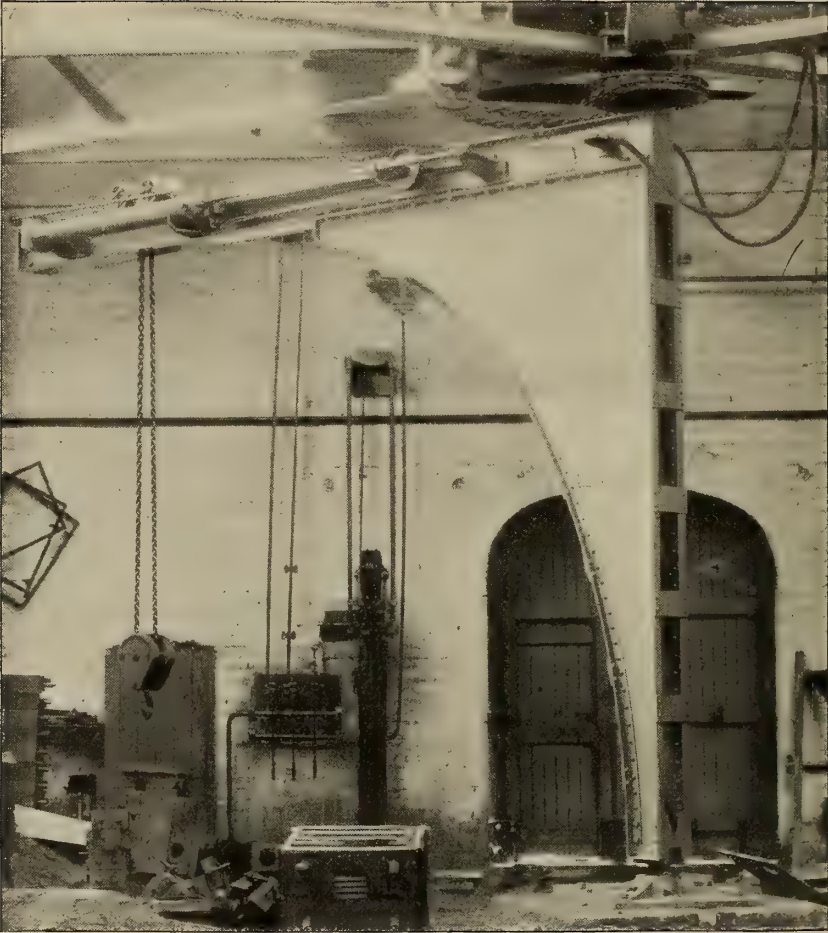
A FOUNDRY CRANE WITH HYDRAULIC TRAVERSING GEAR.
